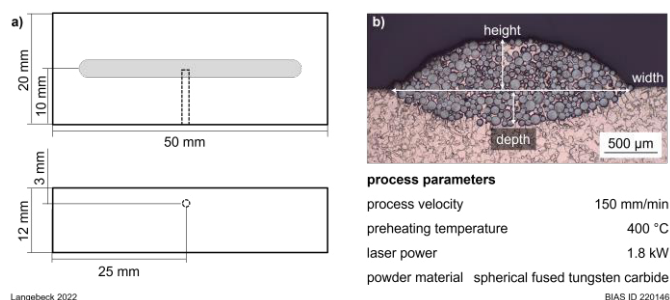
a) Position of the thermocouple and b) MMC cross-section.
